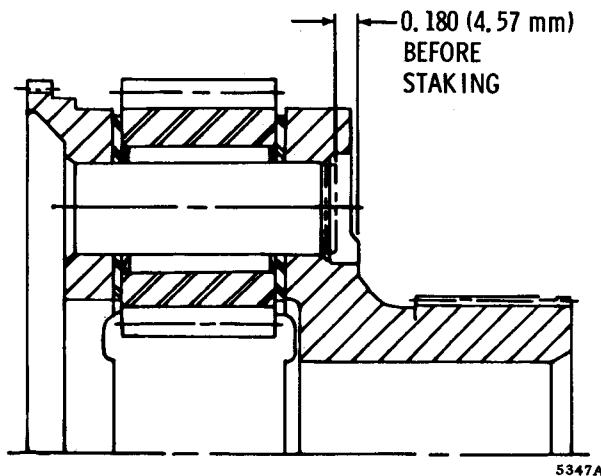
Four-pin, low-range planetary carrier assembly—cross-section view
